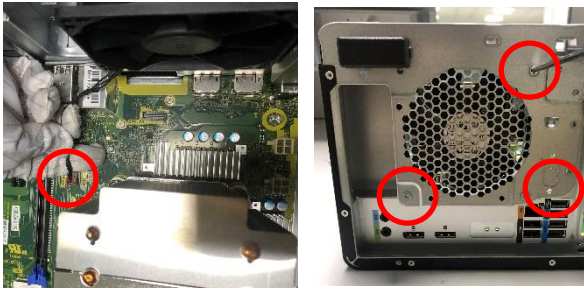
Disconnect the cable and use Philip #0 screwdriver to loosen the screws.
